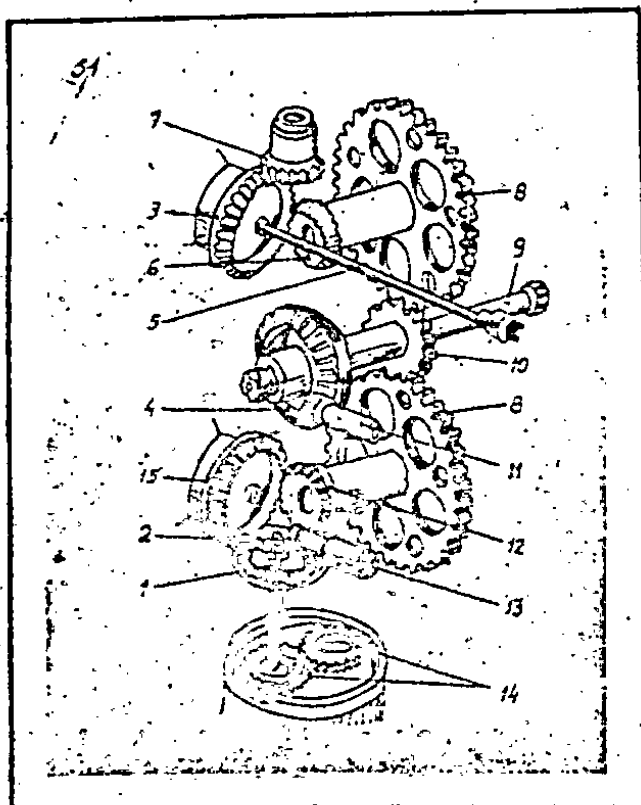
Mechanical Scheme of the Auxiliaries Drive Box.
